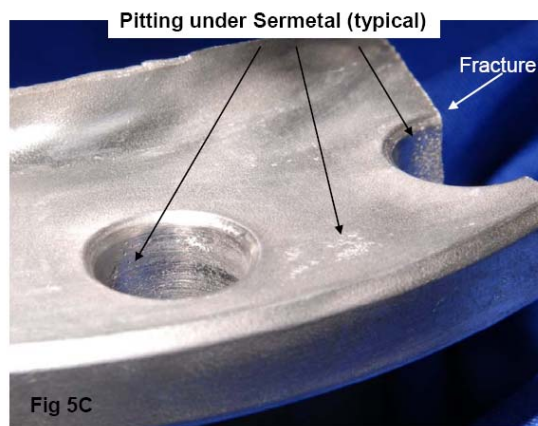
C: Flange and bore surface adjacent to fracture with Sermetel removed to expose underlying base metal pitting.
